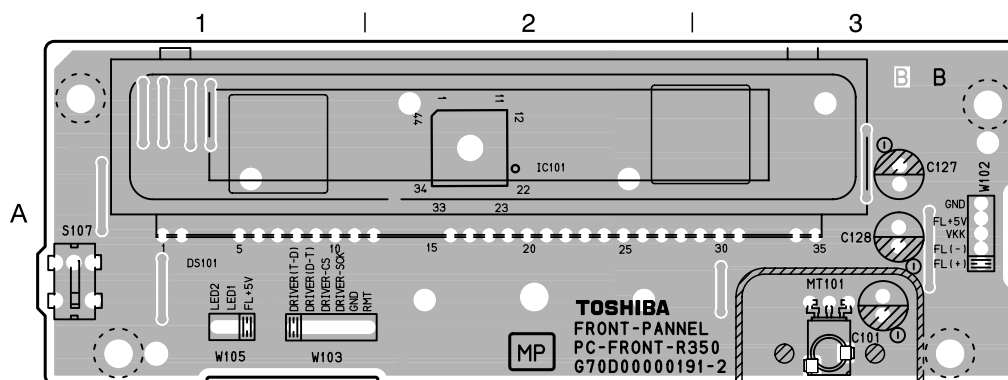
EU03A Front (R) PC Broad (Top side)
